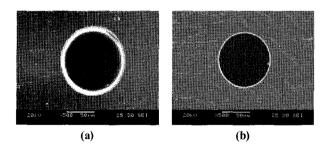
Drilling a hole using UT-MEDM method (workpiece: 300 μm thick 304 SS): (a) hole entrance (diameter: 106 μm), (b) hole exit (diameter: 90 μm)
